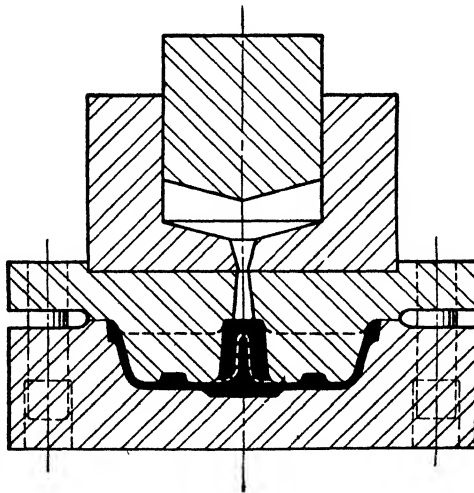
A flash mold arranged for use with a transfer molding pot in which the powder charge is plasticized. Note web taper, corner radii and reasonably uniform sections of desirable part design.
